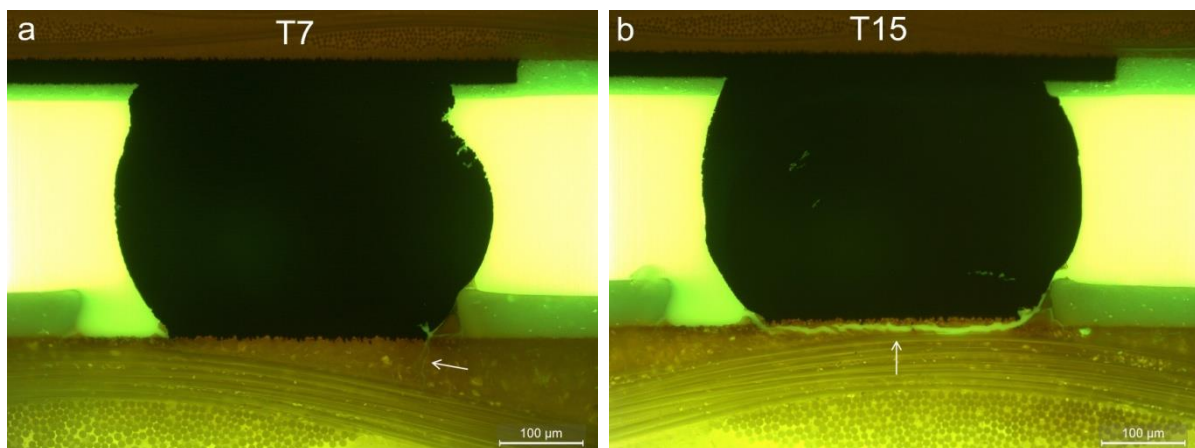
Cross-sections of solder joints a) T7 and b) T15 in the second row of solder joints to a BGA208 with the ImAg/SAC305 combination that failed after 1631 cycles showing cracks in the PCB laminate.
